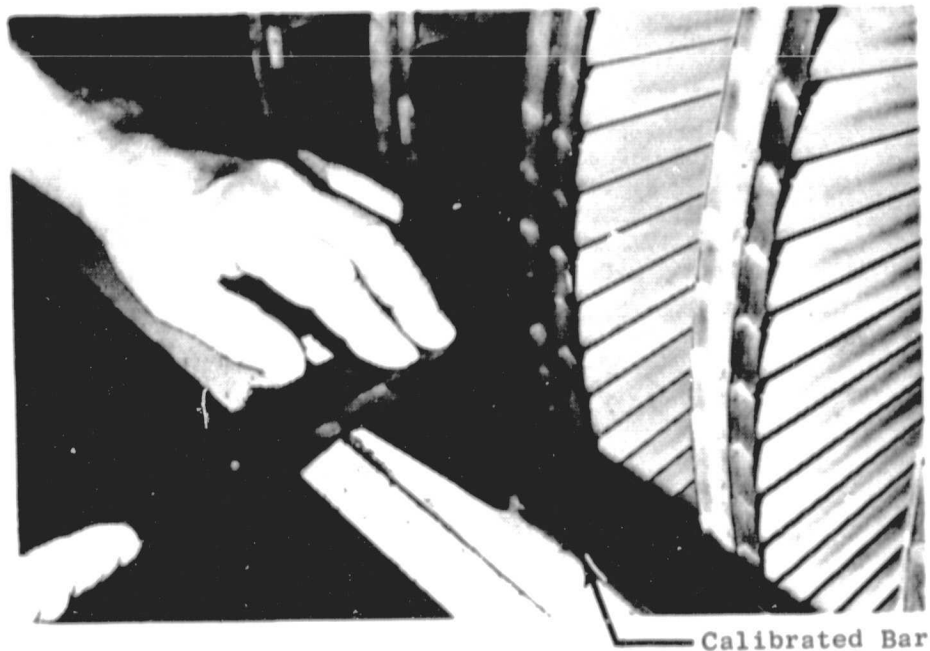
Setup for LP Turbine Rotor Radii Measurements.
